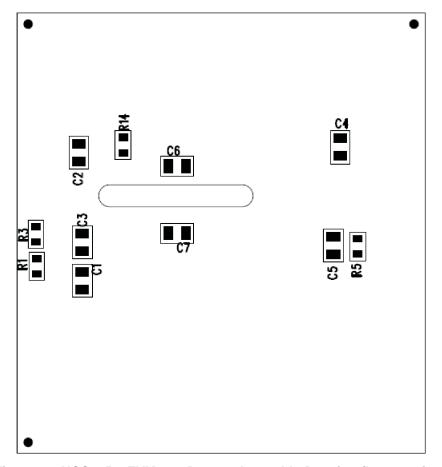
UCC27531EVM-184 Bottom Assembly Drawing (bottom view)
